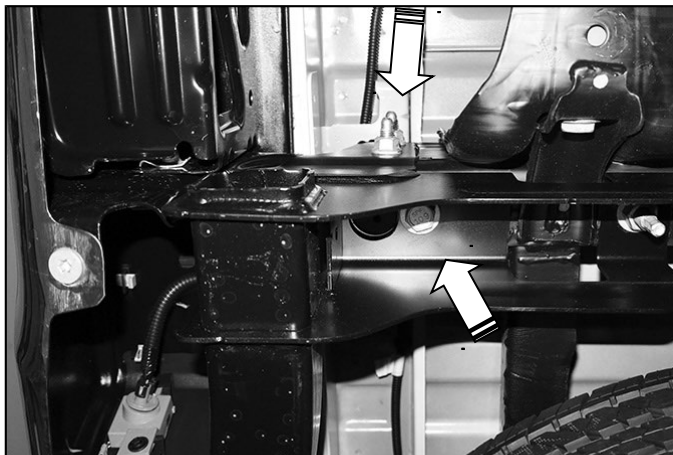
Remove bumper bolts from outside of frame (arrows). Passenger side pictured from below
